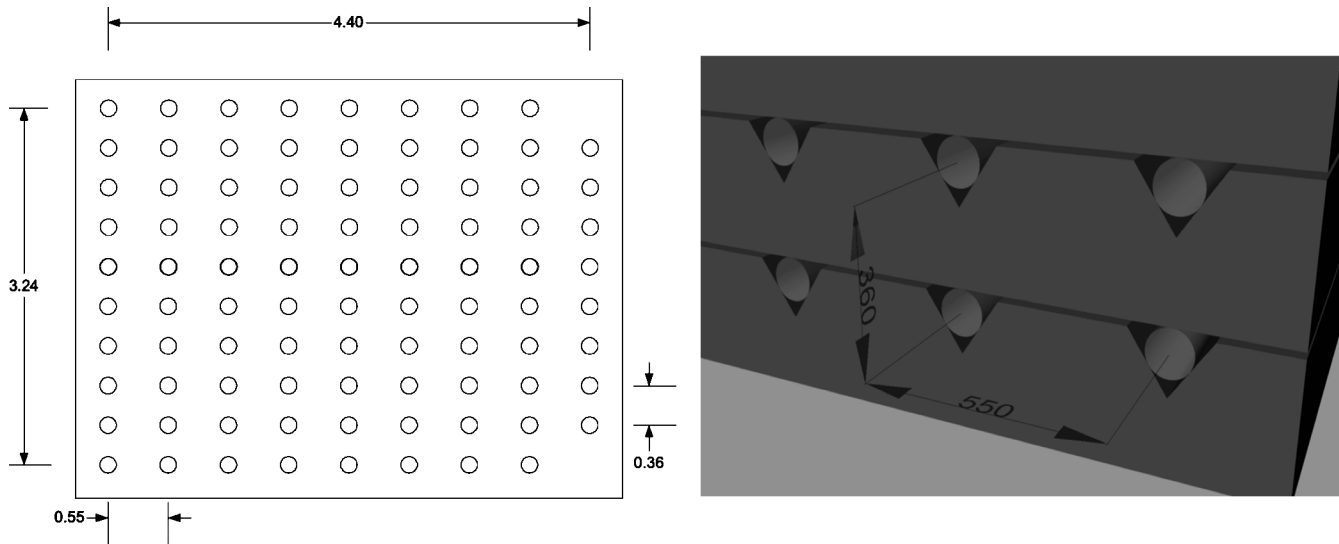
Left*: Ferrule hole pattern (dimensions in millimeters); this method would have provided a more precise fiber bundle. *Right*: Illustration of the stacked silicon *v*-groove spacers. These ended being used because they had already been fabricated and were available. See the electronic edition of the *PASP* for a color version of this figure.
